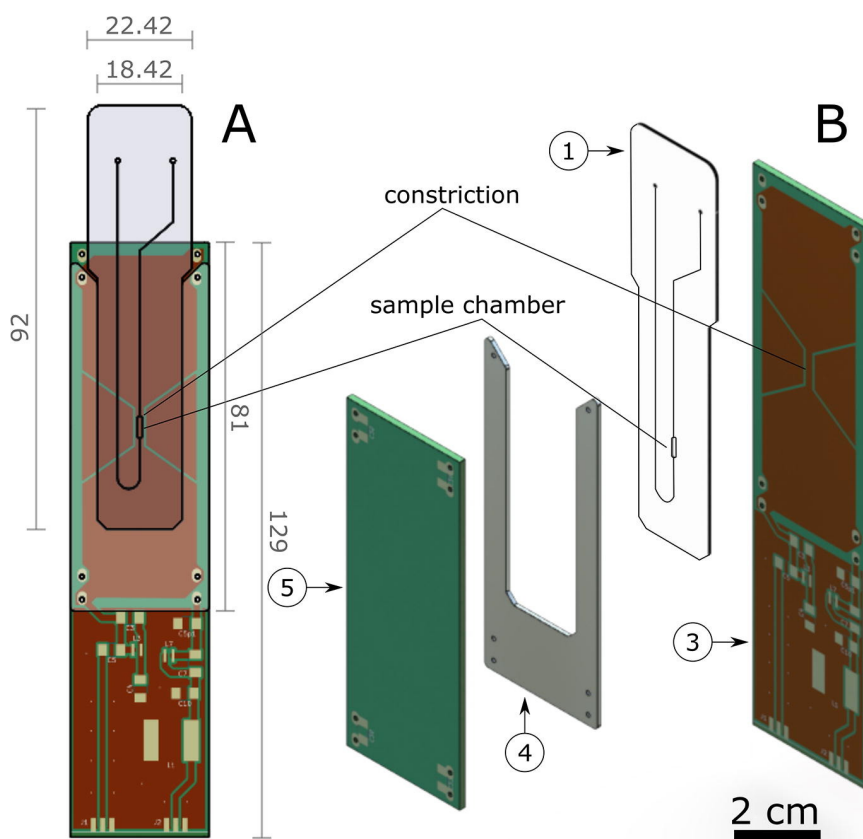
Drawings of the detector assembly and the microfluidic device (1). A: front view (dimensions in mm); B: exploded view. Spacer (4) ensures the alignment of the sample chamber with the constrictions on the PCB planes. In A, PCB plane 5 is hidden to show the orientation of 1 with respect to PCB plane 3. Thickness of each of the PCB planes is 1.52 mm and the copper layers on the PCBs is 35  $\mu$  m. Both the microfluidic device and the spacer are made from PMMA and have thickness of 0.9 mm and 1 mm respectively. Figure reproduced from [89].
